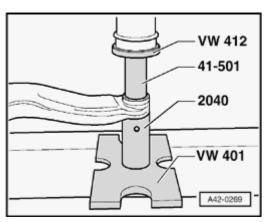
Removing Bonded Rubber Bushing Courtesy of VOLKSWAGEN UNITED STATES, INC.
